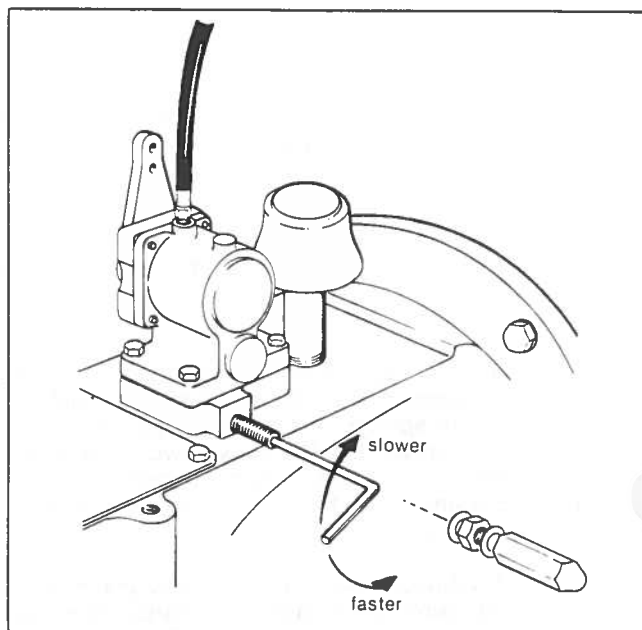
Clutch cylinder timing adjustment; To produce a faster shifting response, turn set screw COUNTER CLOCKWISE. To produce a slower response turn set screw CLOCKWISE.
